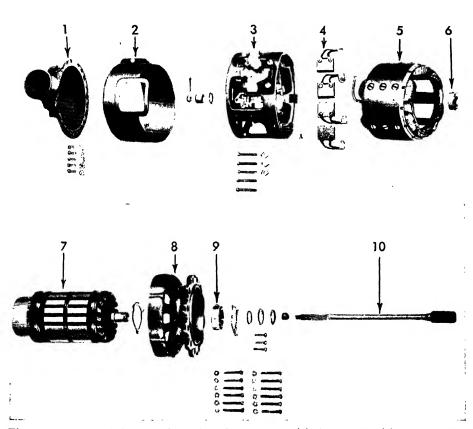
An exploded view of an aircraft generator. (1) Air scoops; (2) cover bands; (3) commutator end frame assembly; (4) brushes; (5) field frame assembly; (6) ball bearing; (7) armature; (8) drive end frame; (9) ball bearing; (10) drive shaft. (Courtesy Delco-Remy Division, General Motors Corporation)
